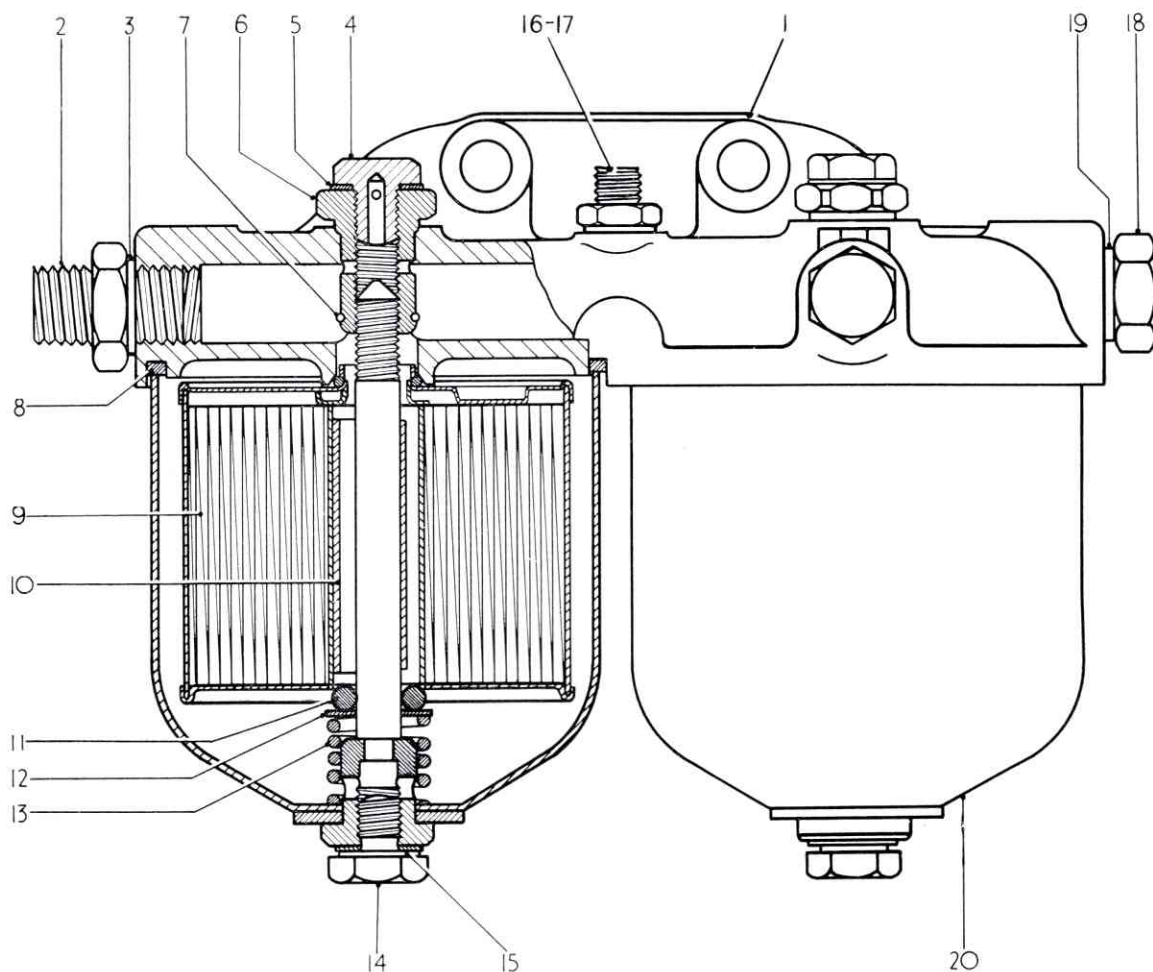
SECTION THROUGH THE FUEL OIL FILTER
